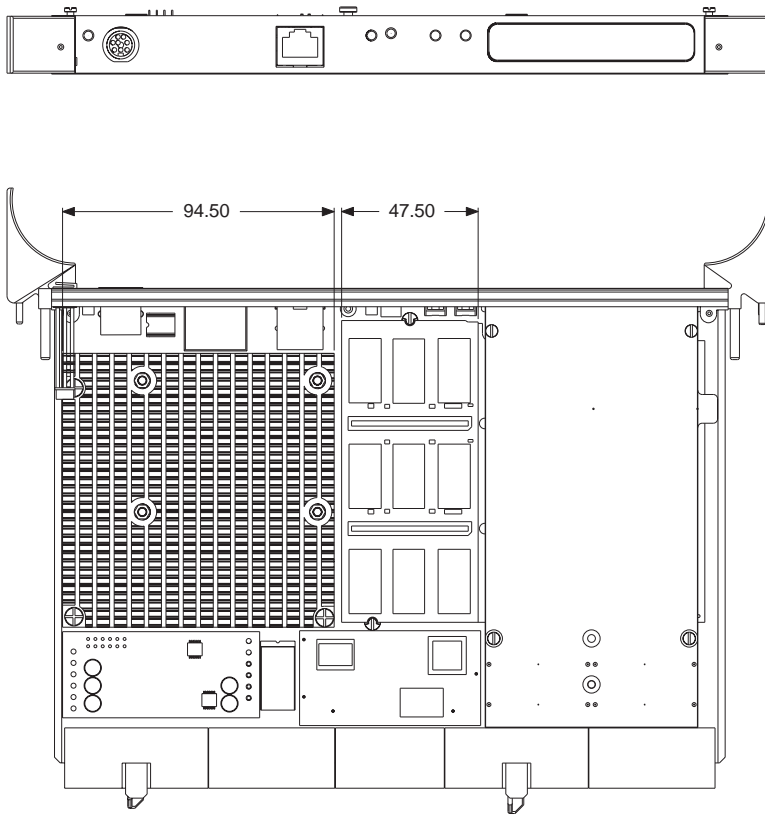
Mechanical Dimensions of the Heatsink and Memory Module
